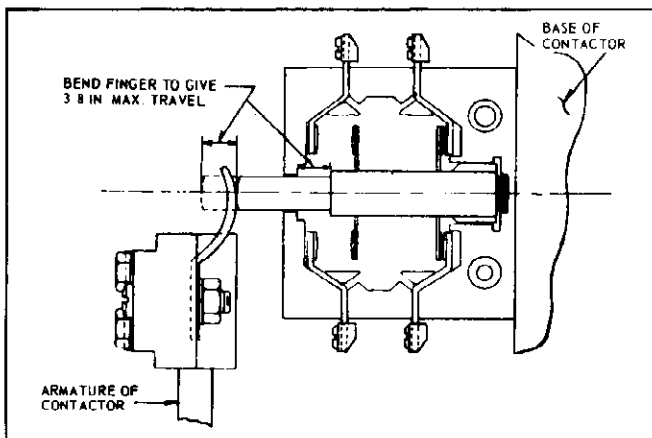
L64 Auxiliary Contacts with cover removed on Type M Contactors, Sizes 5 to 7
